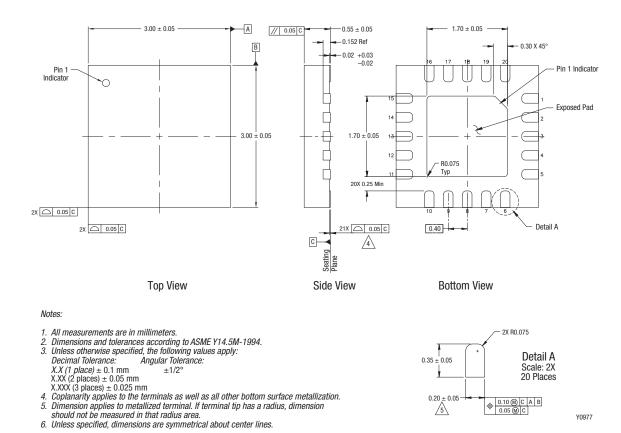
SE2611T 20-Pin QFN Package Dimensions
